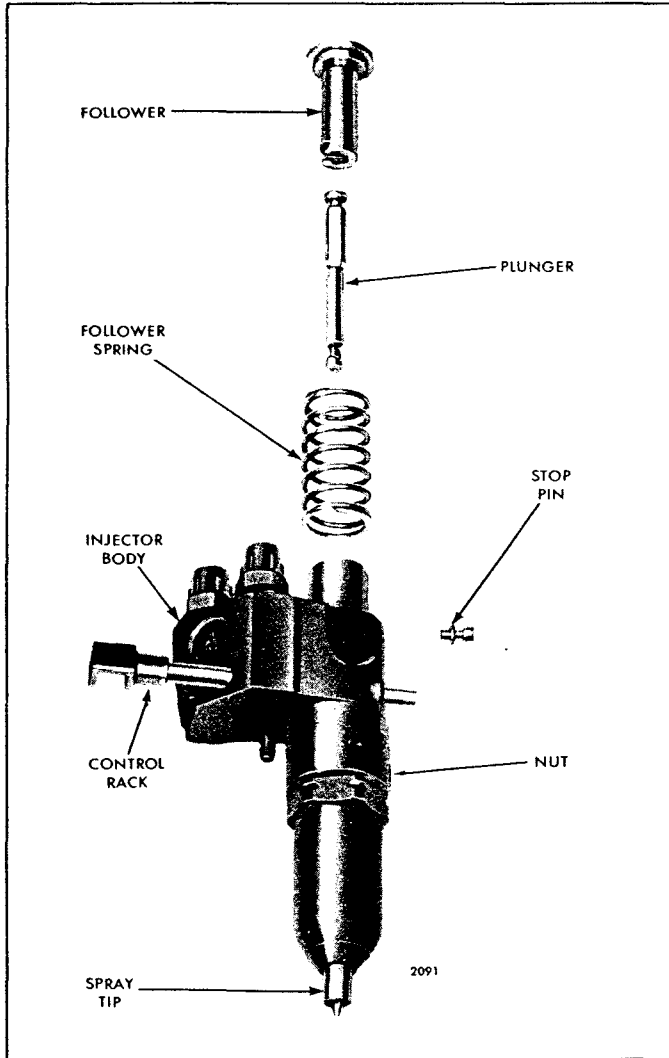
Injector Plunger, Follower and Relative Location of Parts
